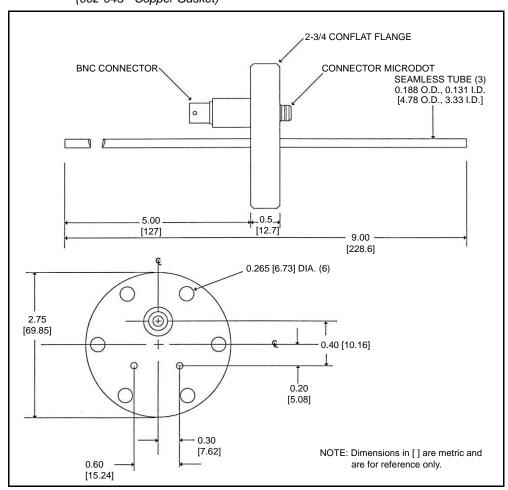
2 3/4 Inches Single Coaxial Feedthrough (002-043 - Copper Gasket)
